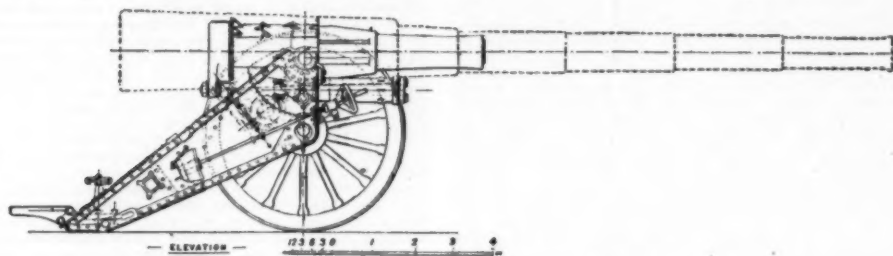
47-INCH QUICK-FIRE GUN ON 6-INCH HOWITZER CARRIAGE.
